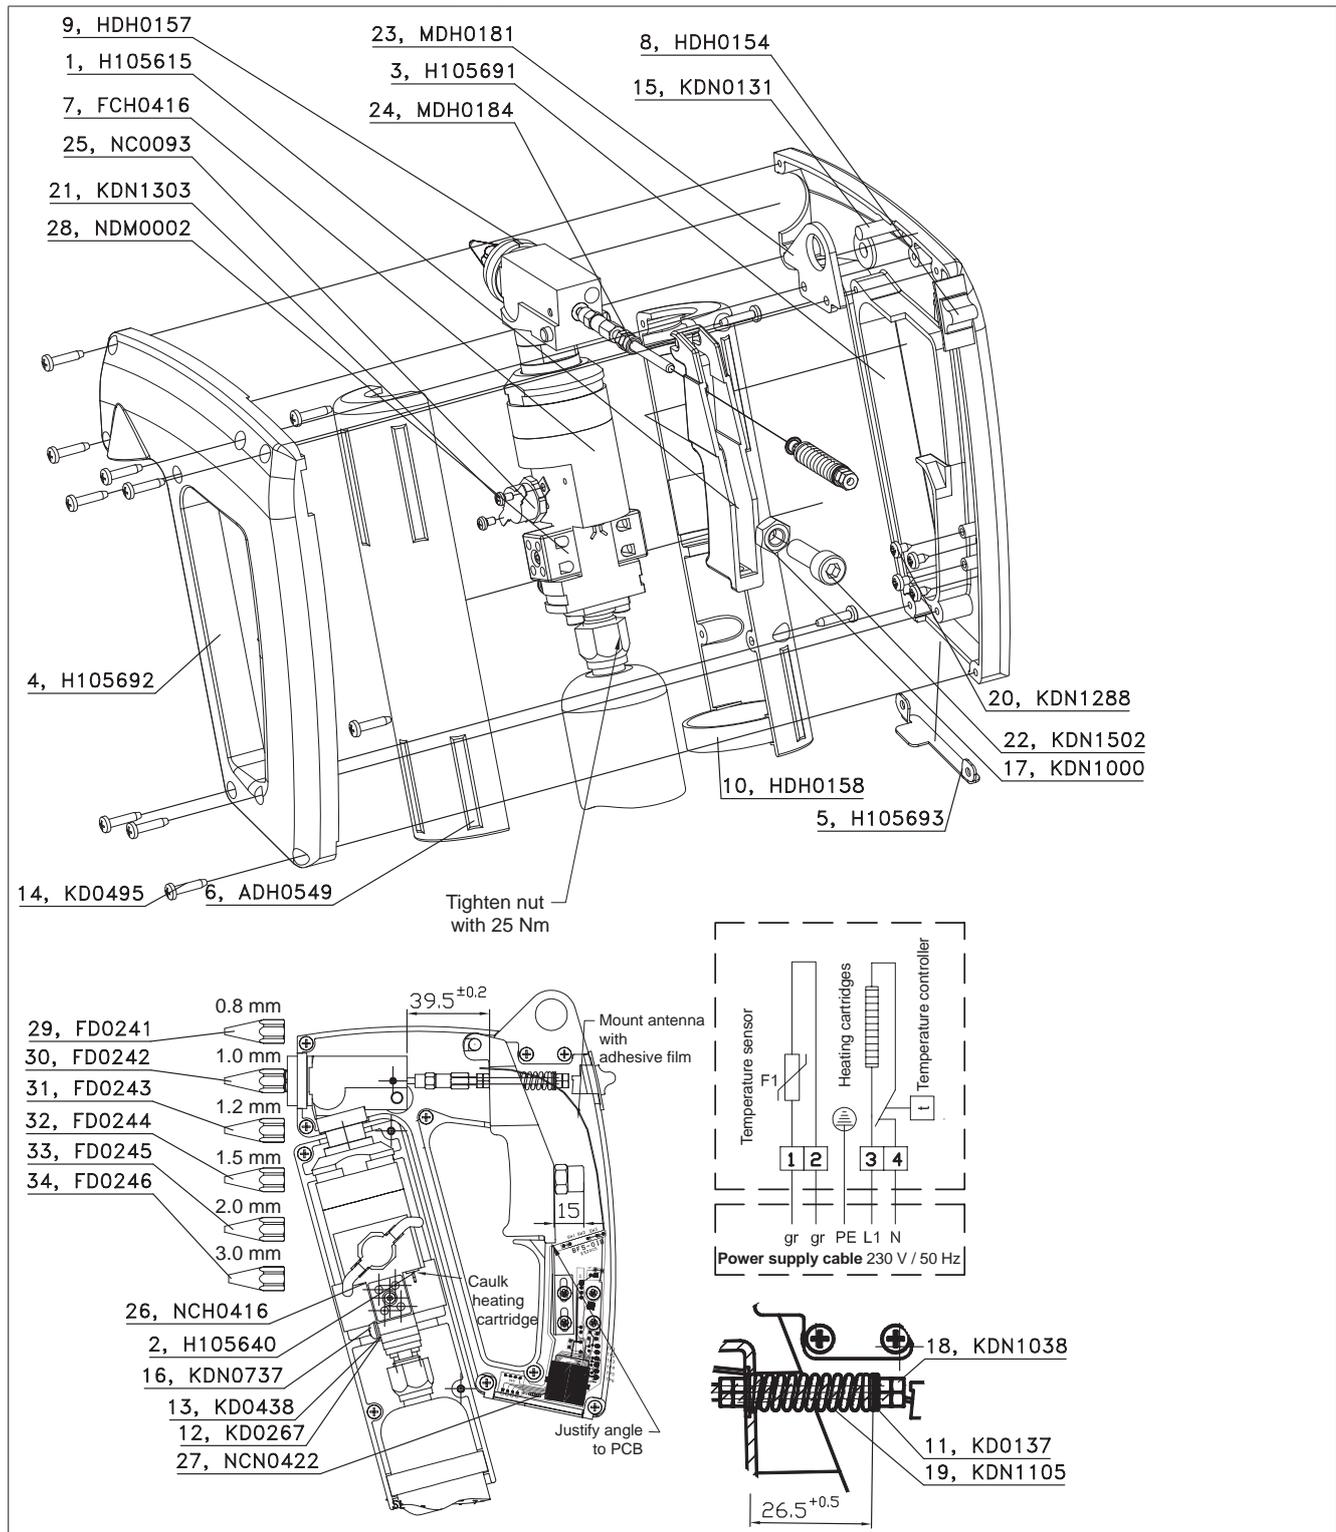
/1: Spare parts, manual application unit, Extrusion Version
